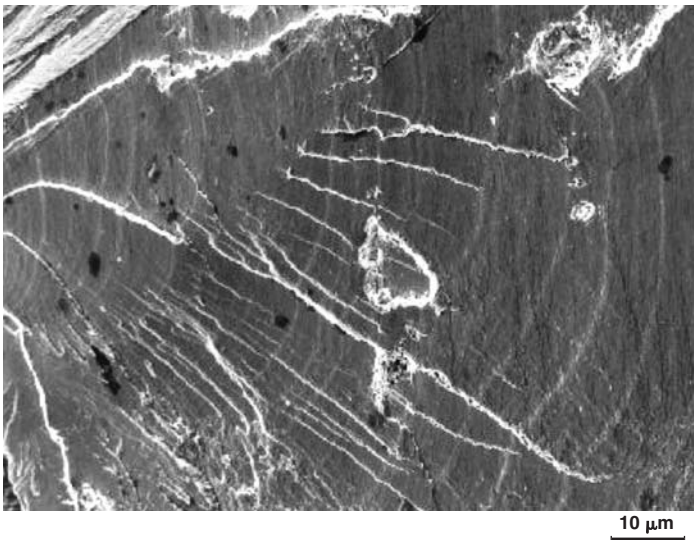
SEM fractograph showing fatigue striations at location A shown in Fig. CH33.6
